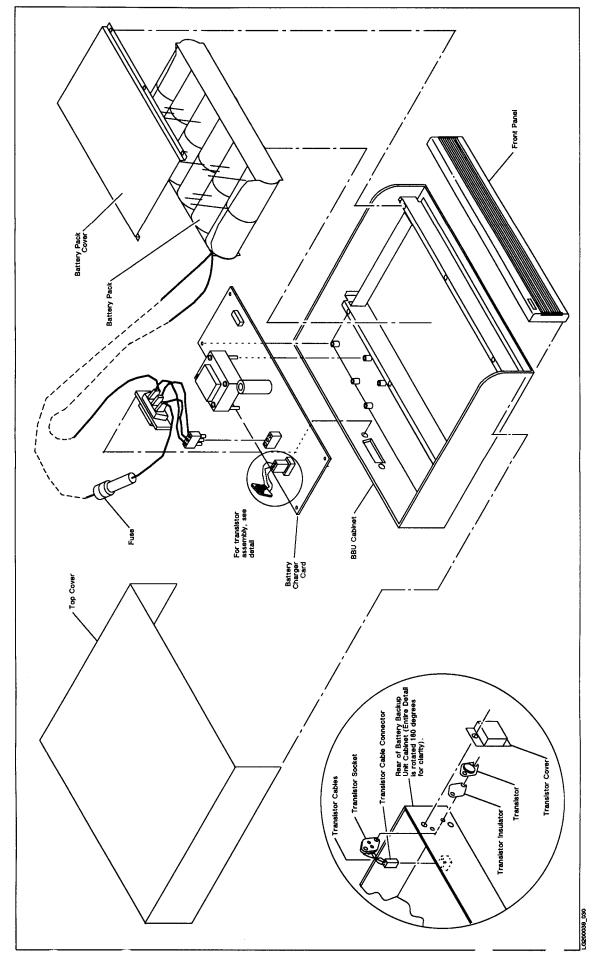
BBU Exploded View Replaceable Parts Page 8-9
